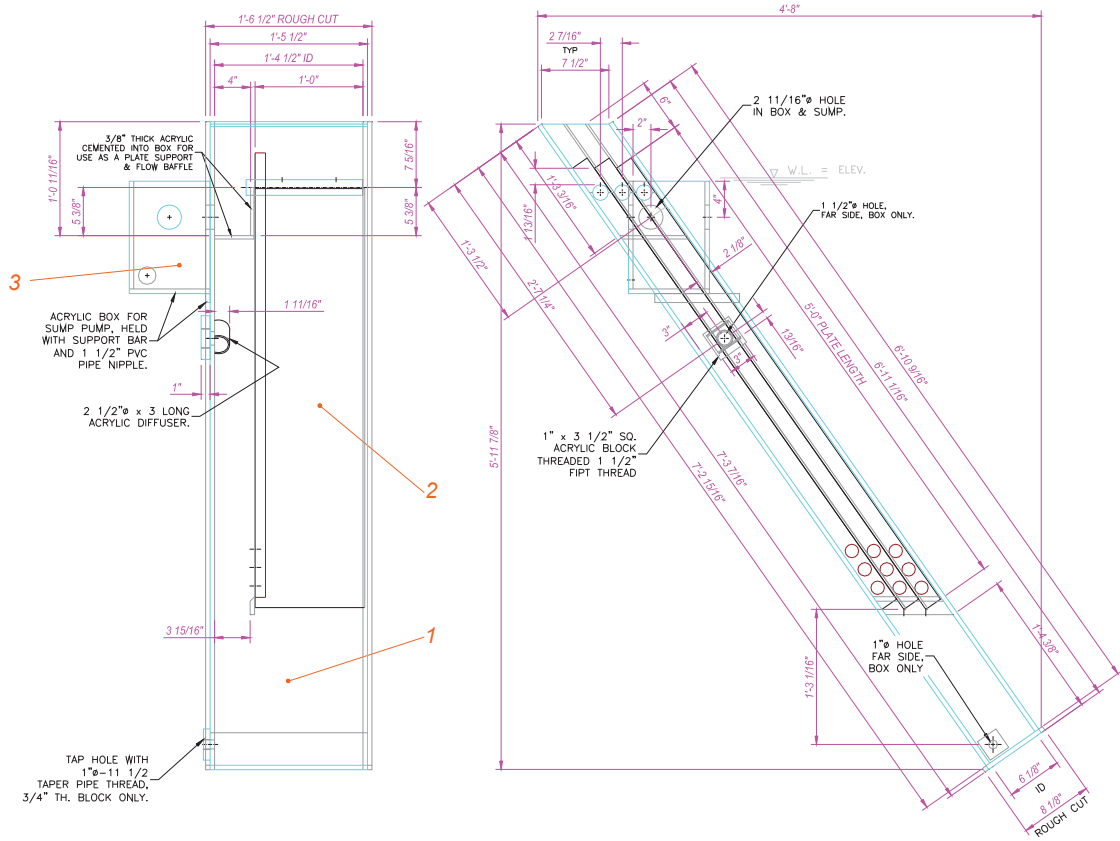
Drawing plate settler (dimensions in inch, not drawn to scale) (Meurer Research Inc.)
